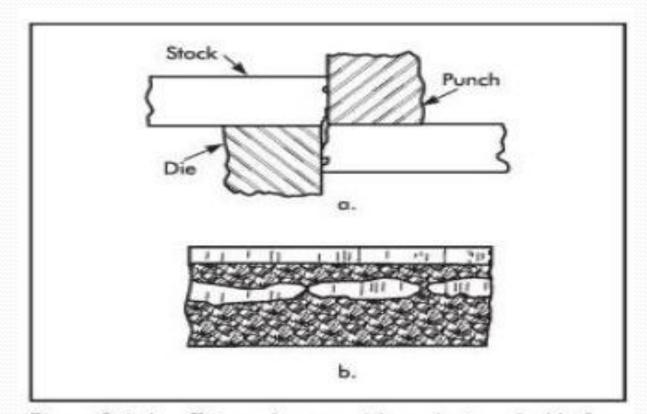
Insufficient clearance (a) results in a double fracture or breakage condition. Appearance of a cut edge with a double-breakage condition (b).
